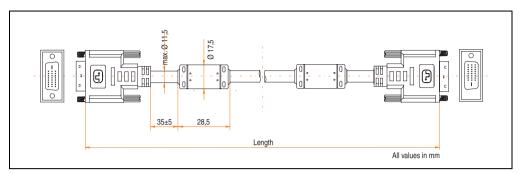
Dimensions - SDL cable 5CASDL.0xxx-00
